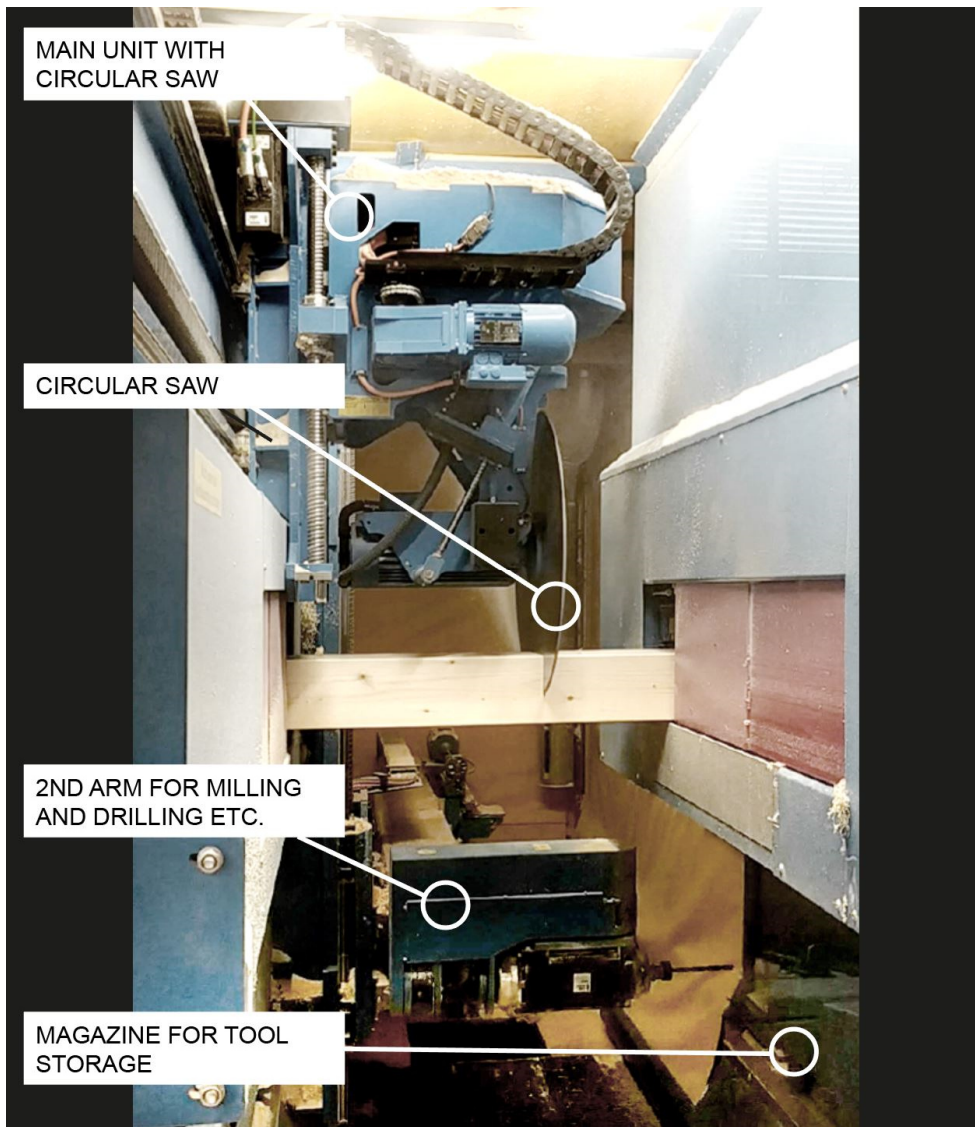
The large circular saw of the joinery robot. At the bottom, a drilling tool can be seen, while on the right, a tool magazine is located, where other milling and working tools are stored.
